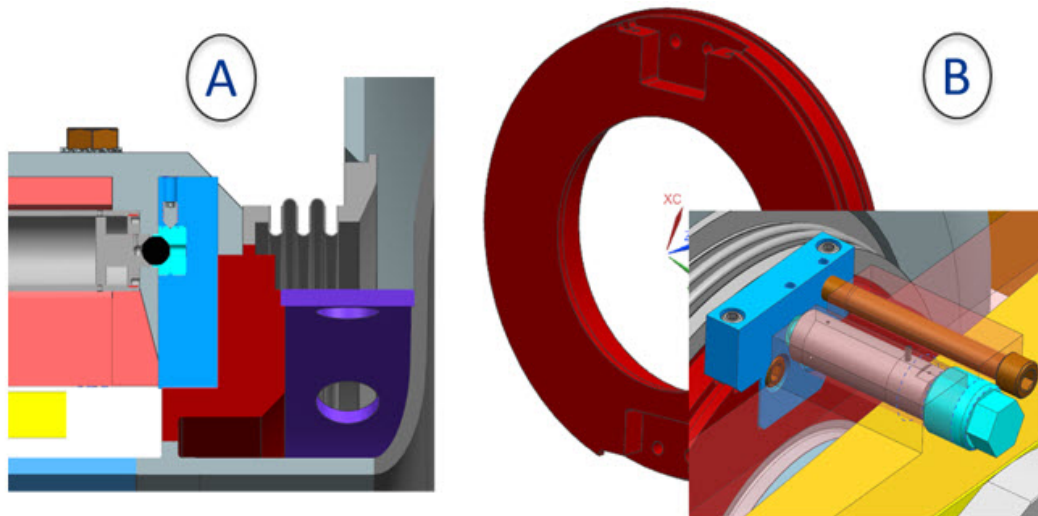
(A) Cross-section of the tuner/cavity interface system. (B) The Nb/Ti interface ring, shown in red, is welded to the cavity beam-pipe. The piezo-capsule - to - Nb/Ti ring interface component, shown in blue, holds the ceramic ball and has threads which connects to the safety bracket.
